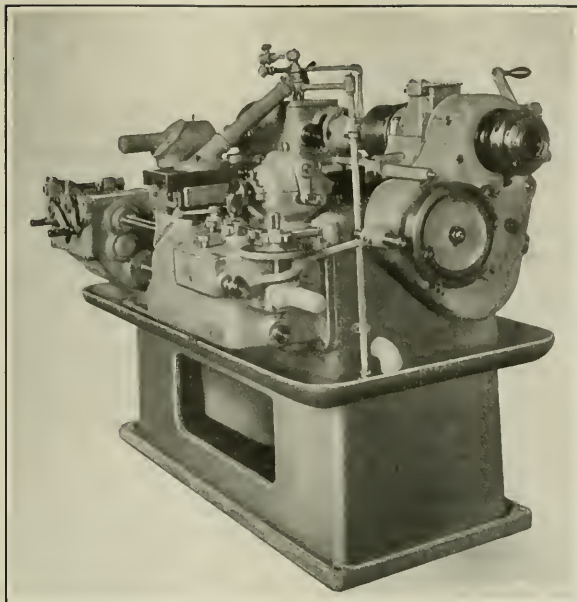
View of Headstock End and Rear Side of Hanson-Whitney Thread Milling Machine
